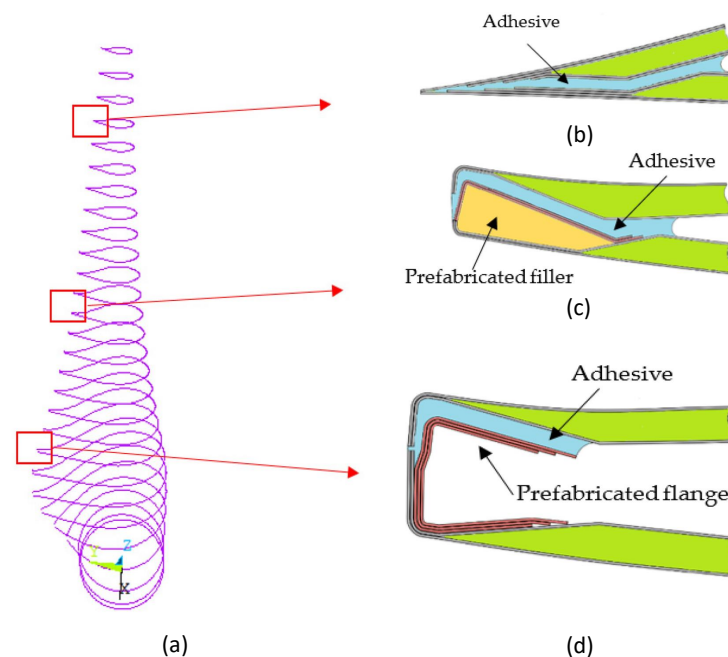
Three types of trailing edge bonding: (a) profile of blade sections; (b) type A: blind bonding; (c) type B: prefabricated filler; (d) type C: prefabricated flange, adapted from [48].
